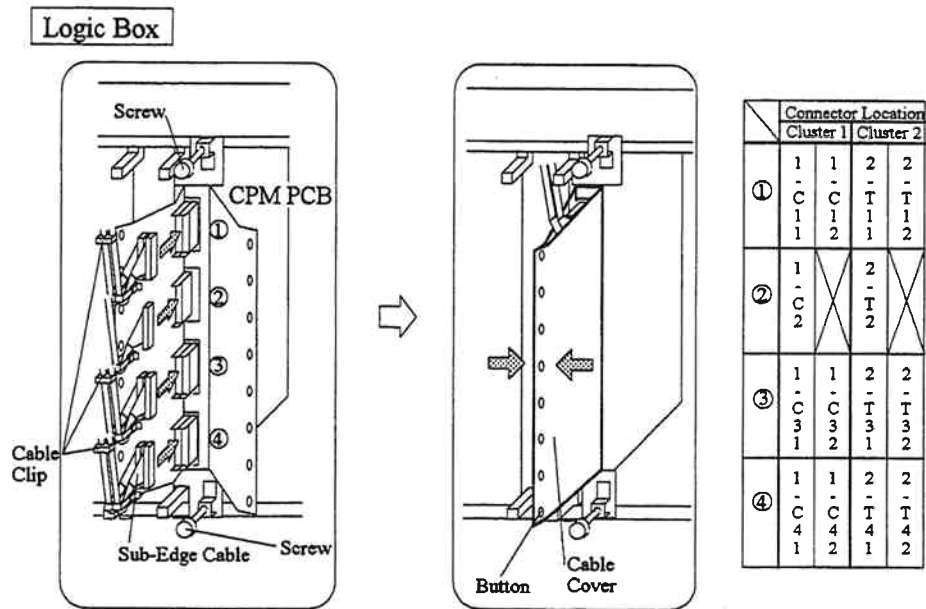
Insertion of the CPM PCB
